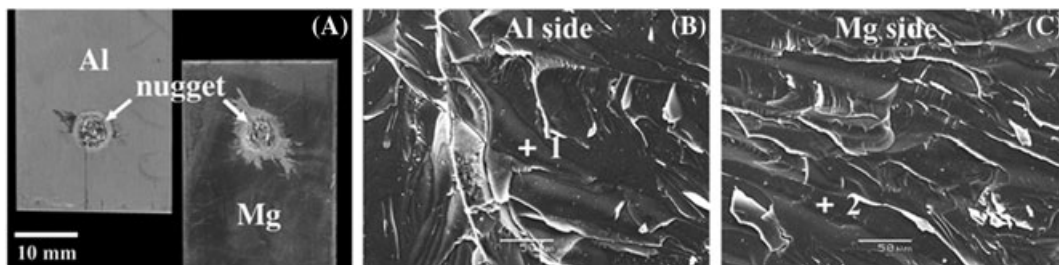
Typical fatigue fracture of Mg/Al direct weld: (a) failure mode, (b) fracture surface in Al side and (c) fracture surface in Mg side; points 1 and 2 are for EDS analyses, the results of which are shown in Table 5.
